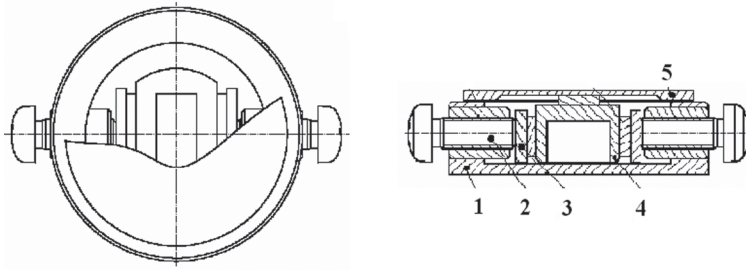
Piezo-module (vibrating table): 1 – frame; 2 – screw holding the piezo-element; 3 – piezo actuator; 4 – in-plane moving table; 5 – out-of-plane moving table
